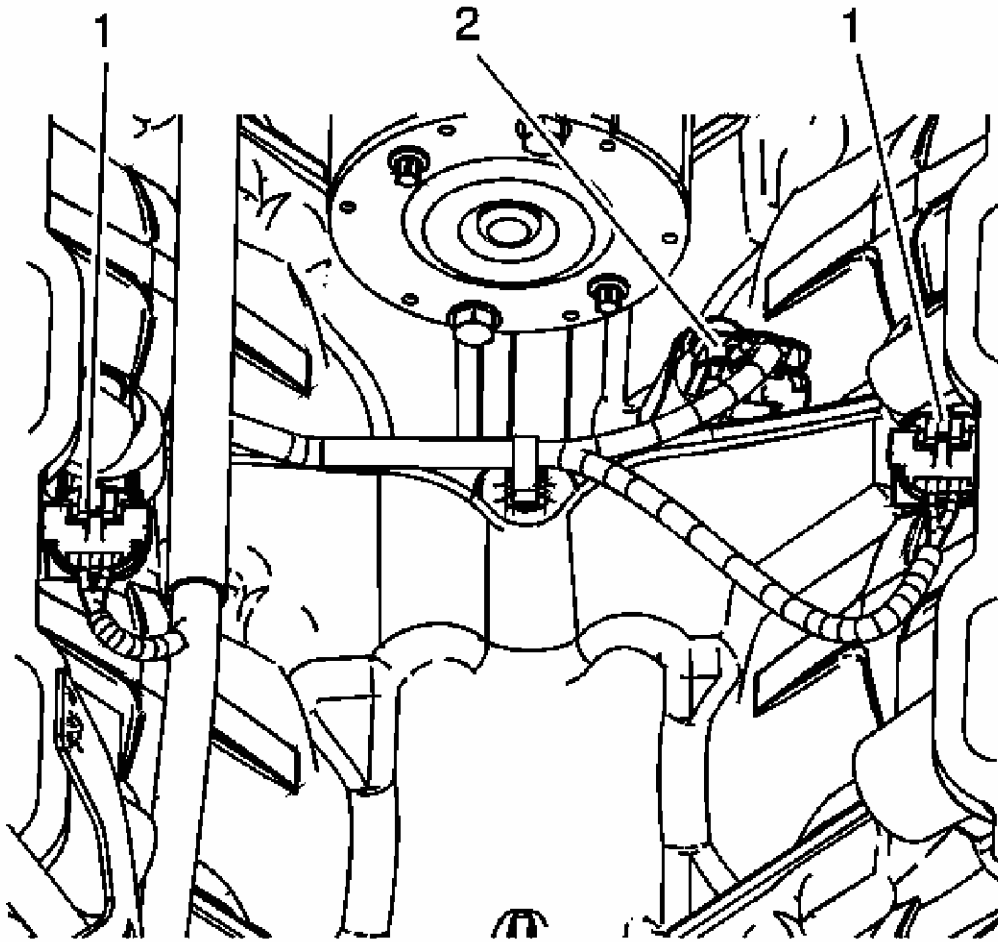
View Of CKP & KS Sensor Wiring Harness
